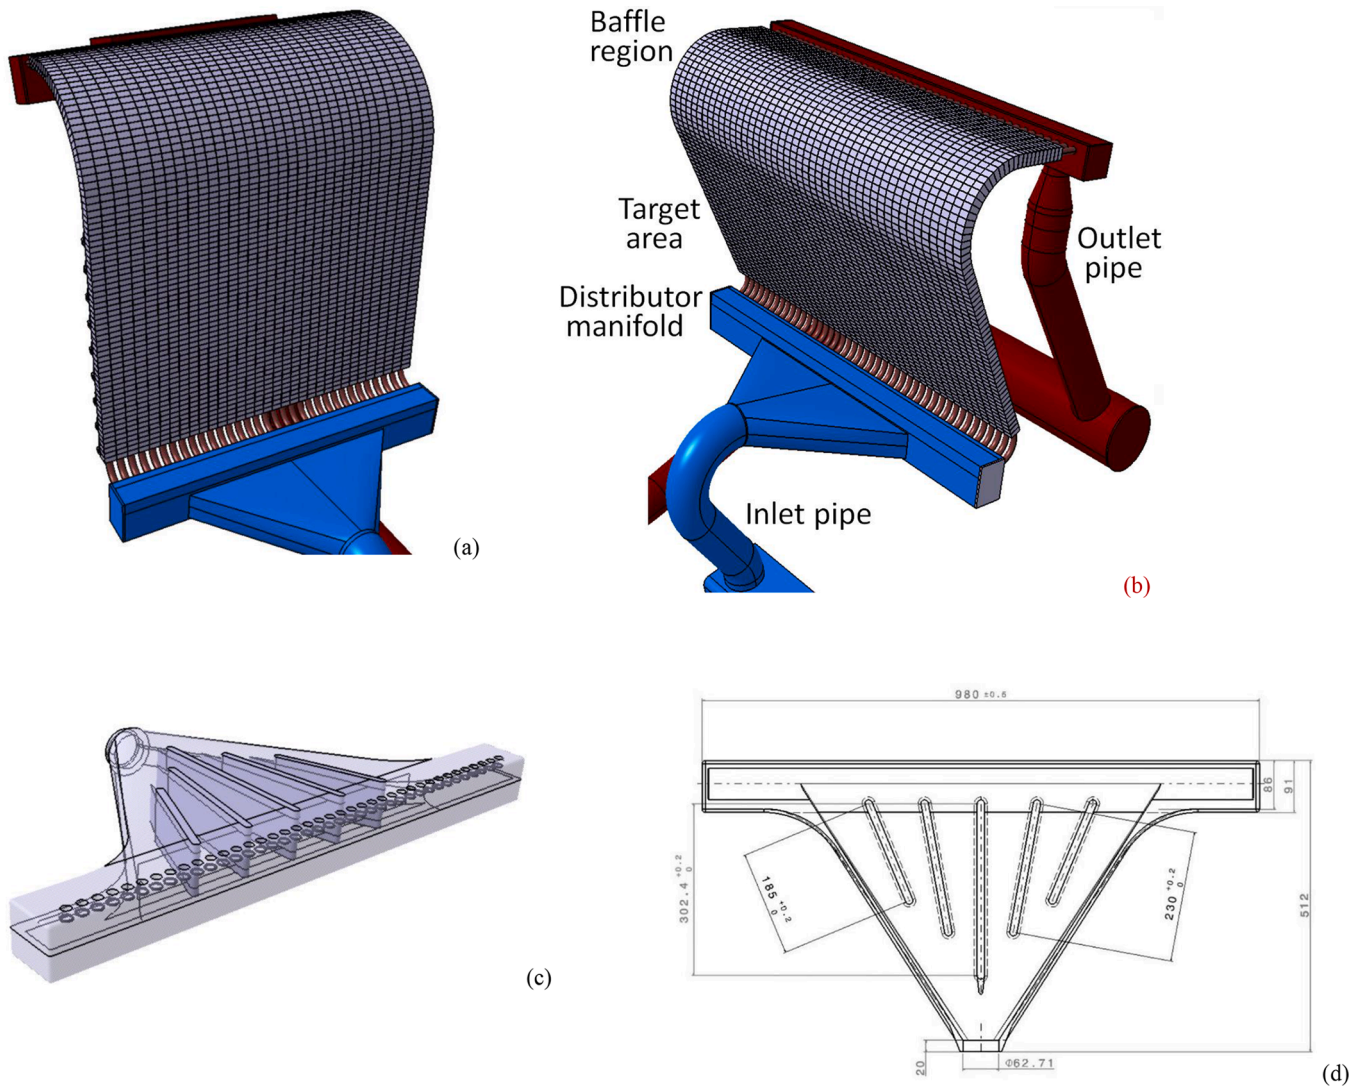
Inboard (a) and outboard target (b) and coolant stream distributor manifold (c, d).
